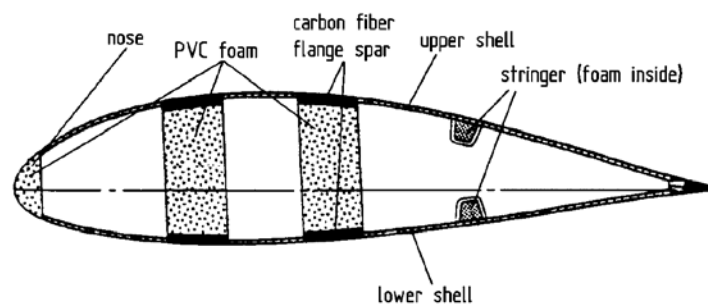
Cross-section details of the 40m long Aeolus II blades [9].
